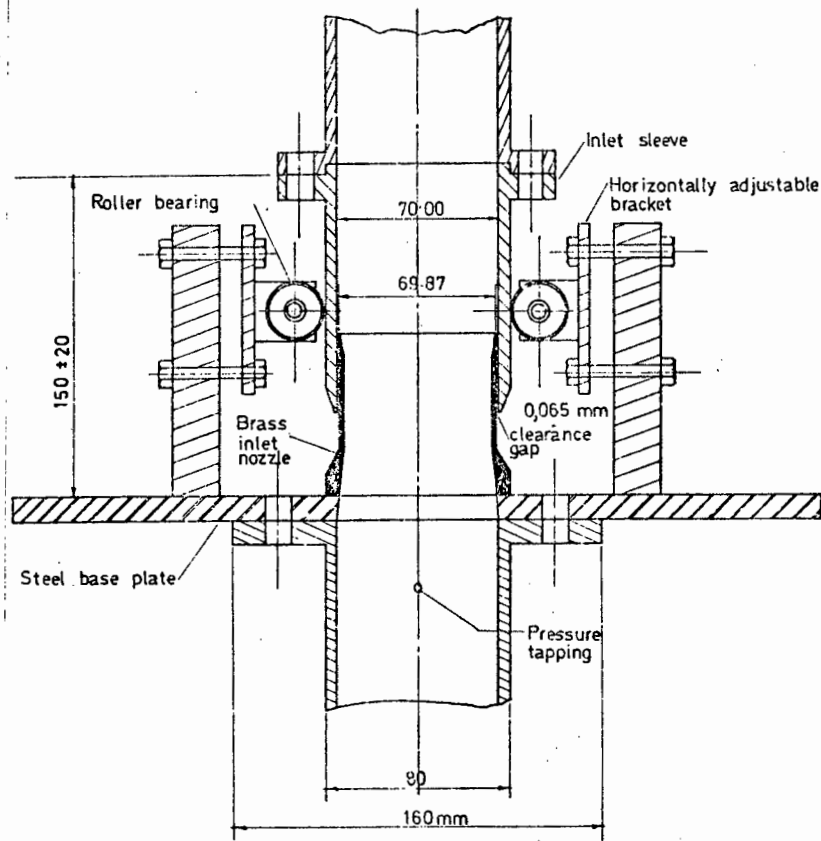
Details of the inlet locating assembly (f). See also Plate 2.
